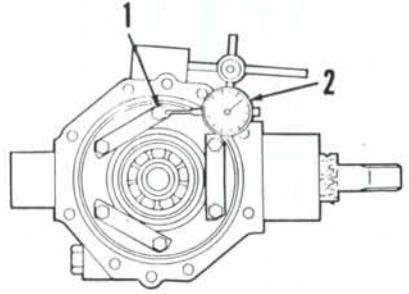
Use a dial indicator (2) to measure ring gear (1) backlash. Refer to text for adjustment.
